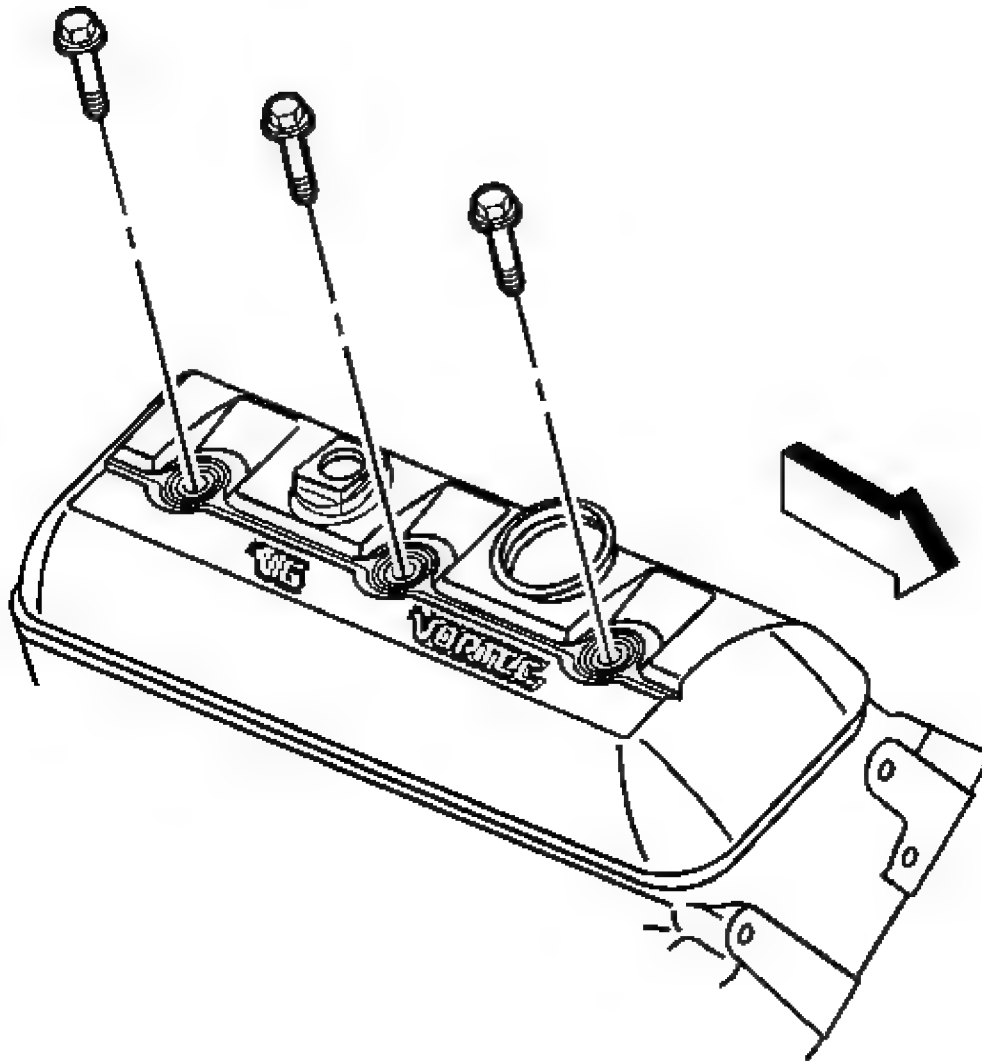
View Of Valve Rocker Arm Cover Bolts (Right)
